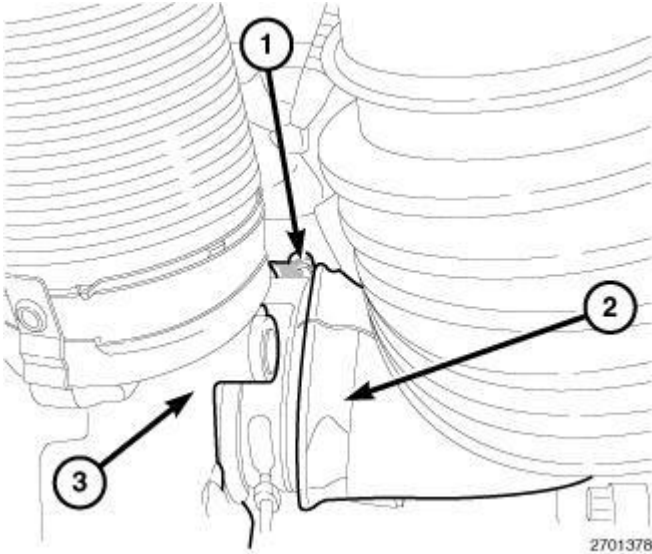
Identifying Worm Clamp, Turbocharger Air Inlet Tube & Turbocharger
